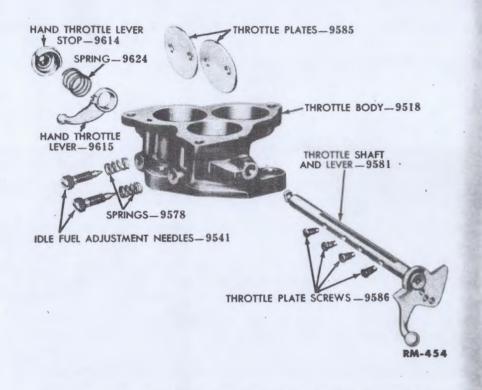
Throttle Body, Disassembled (Dual Downdraft)
